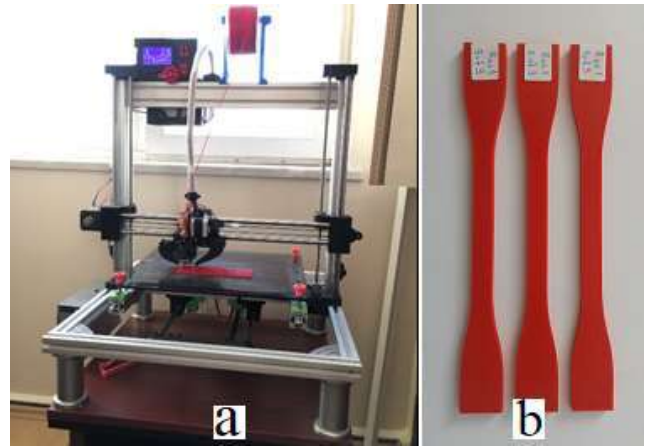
(a) Custom designed printer and (b) fabricated specimens
